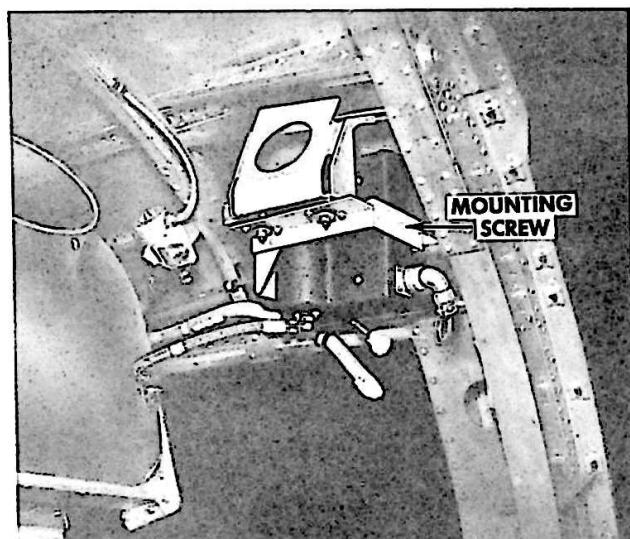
Pressuretrol Mounting, B-29 Airplanes
